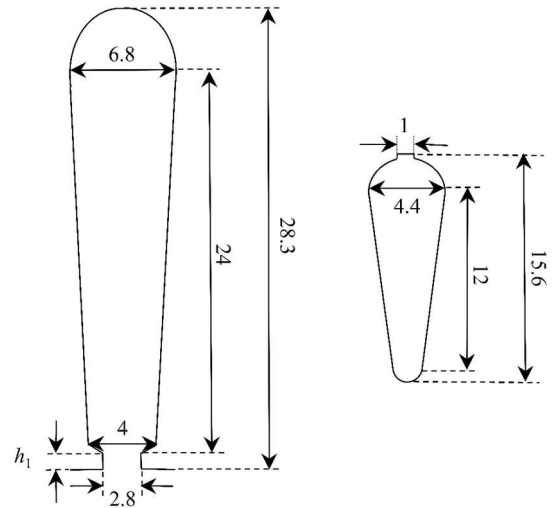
Stator slot and rotor bar dimensions in millimetres. The tooth tip height  $h_1 = 0.7$  mm.
